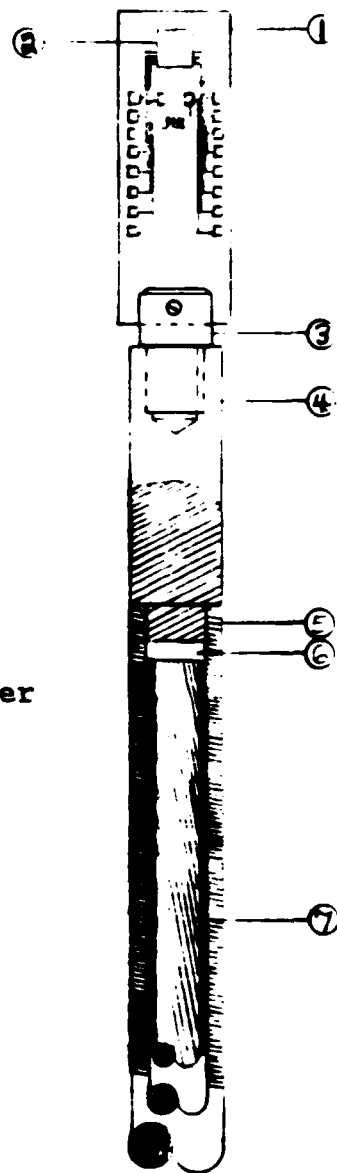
Sketch of the attachment of the pc board to the lower stage of the cryocooler.
